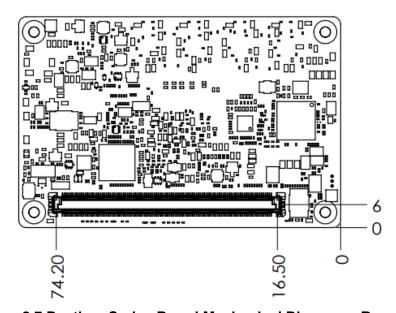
Pentium Series Board Mechanical Diagram – Rear
